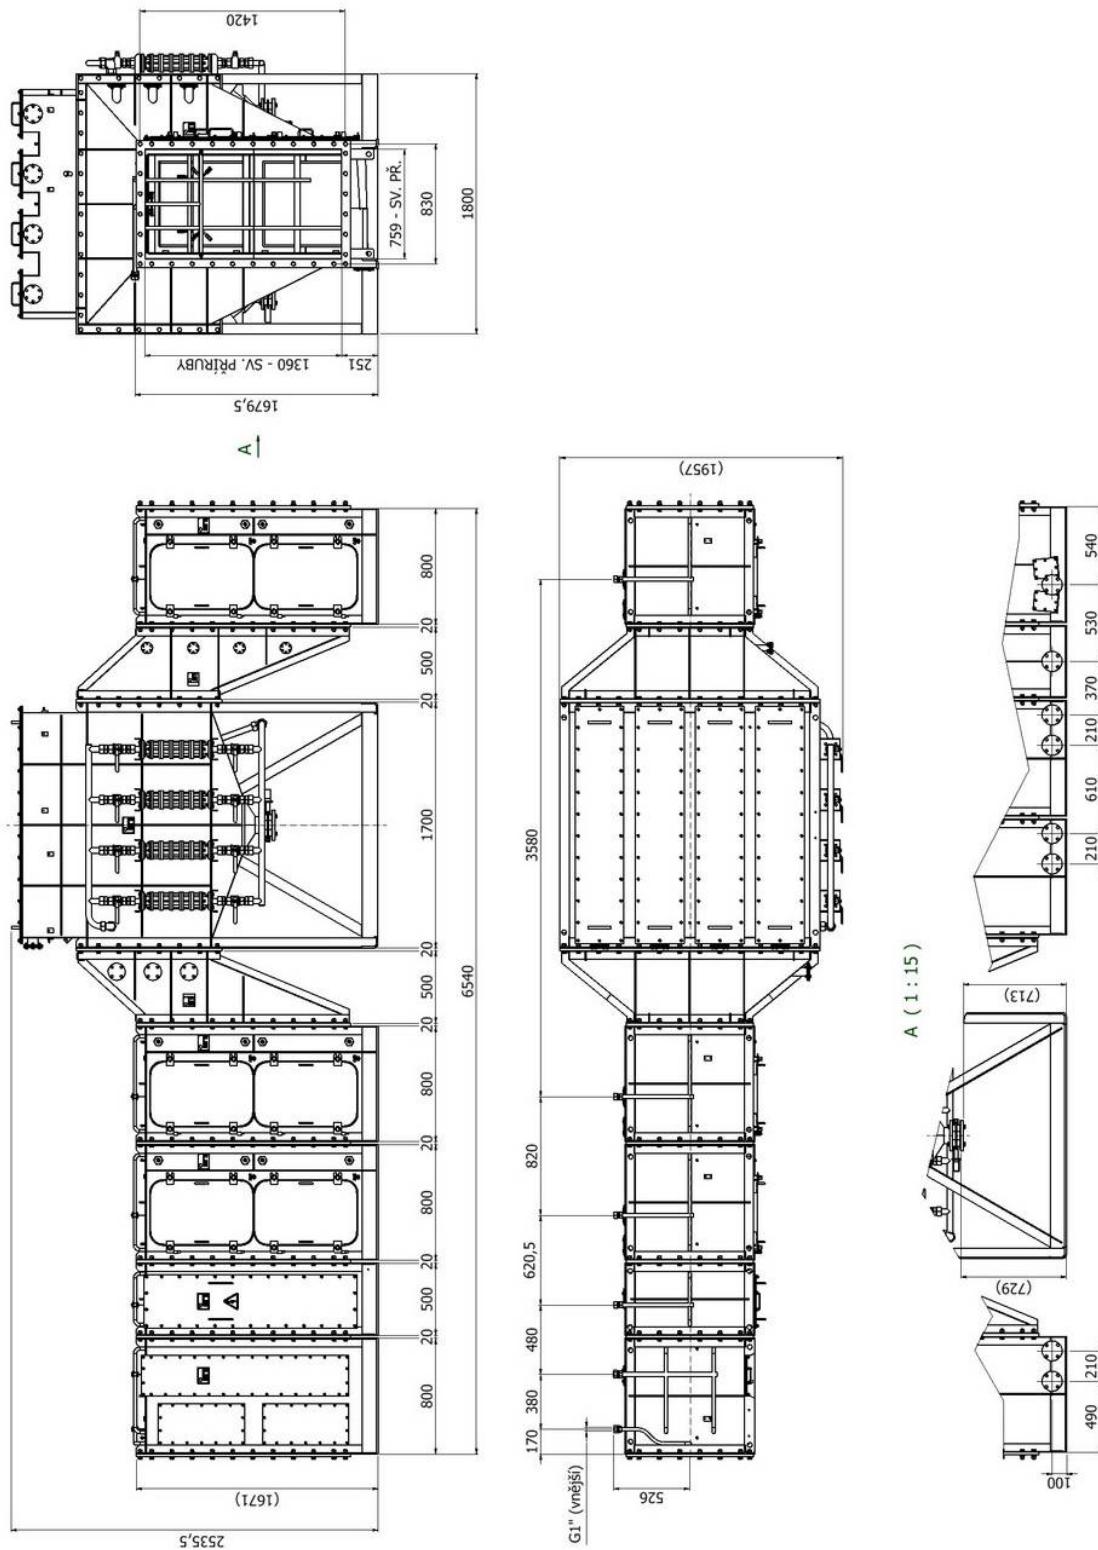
Main dimensions of the filter unit 8, solid right-hand model
